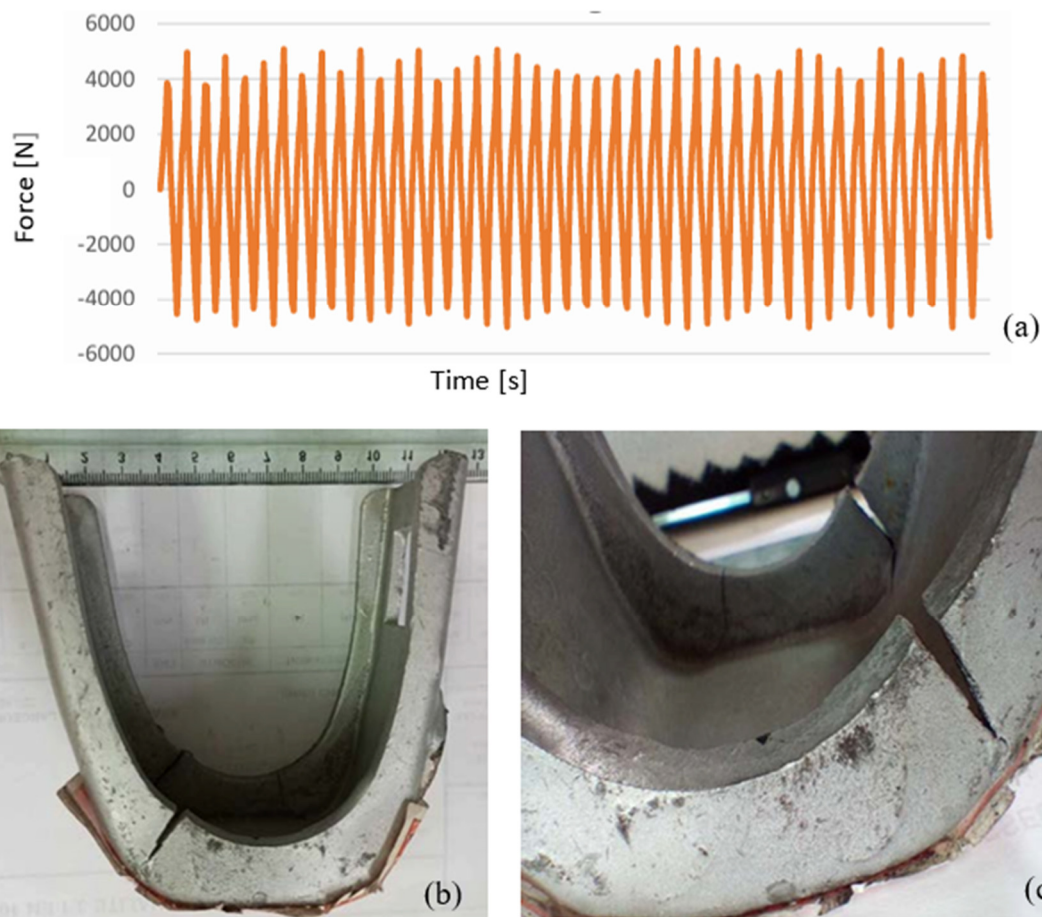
Tensile-compression test with axis using tensile machine; (a) Force-time curve; (b) and (c) Stirrup fatigue (cracks).
